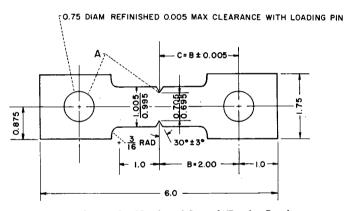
Sharp-Edge-Notch and Smooth Tension Specimens.
